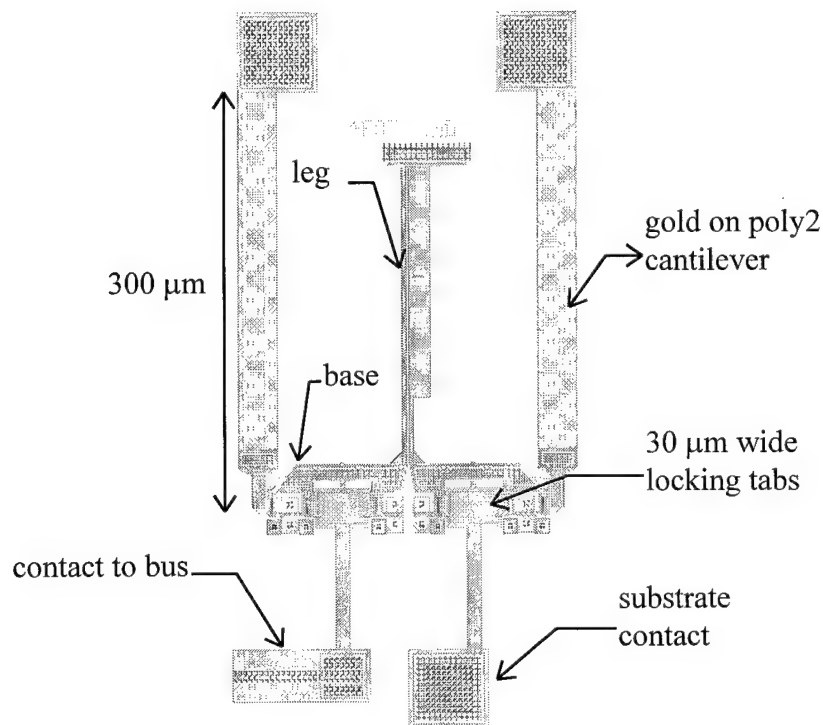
CADENCE drawing of a prototype microrobot leg self assembly system designed for fabrication in the MUMPs 21 fabrication run.
